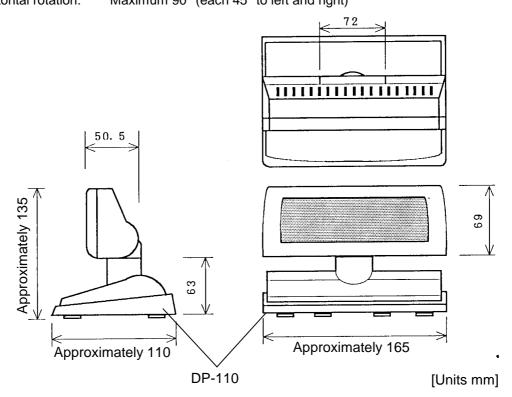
DM-D110 External Dimensions (Reference) with Option Stand (DP-110)
